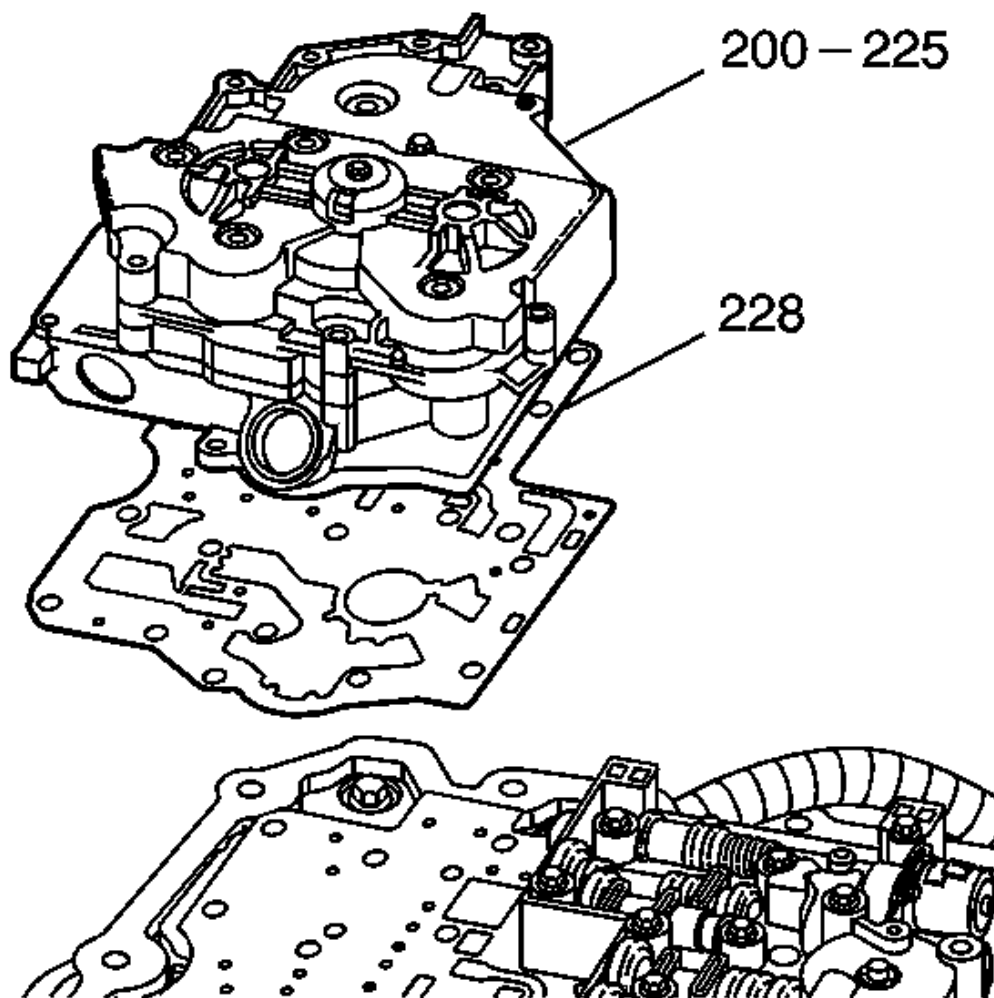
View Of Scavenge, Primary And Secondary Pump Assemblies
